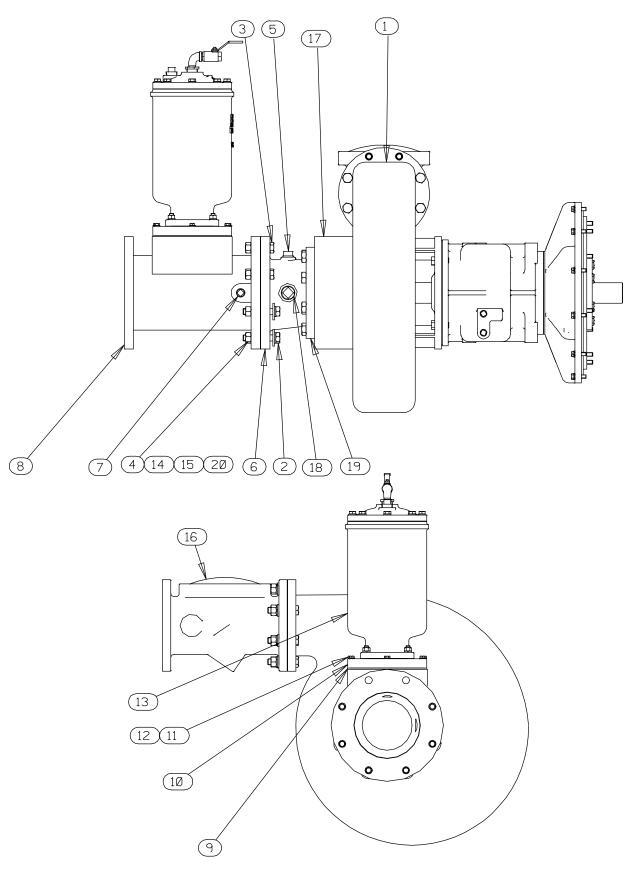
PA6G60-(SAE 1/14) Pump End Assembly
